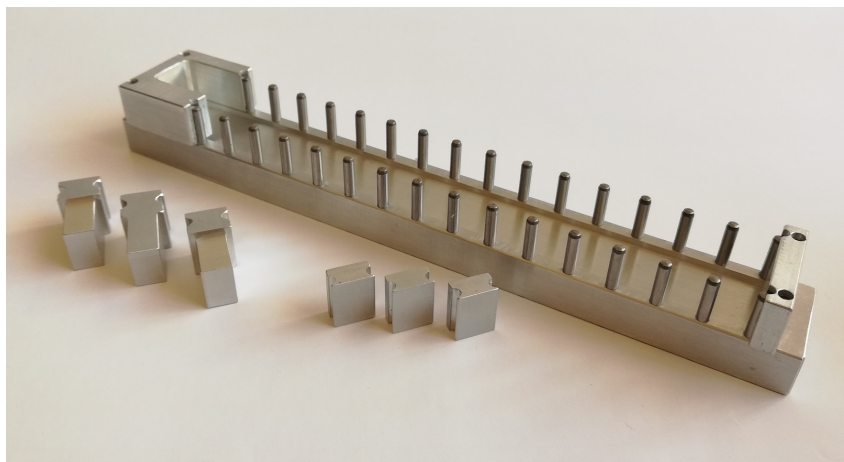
Parts of aluminium mould used to manufacture the modular actuator
